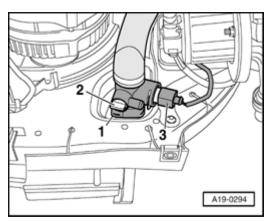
Identifying Drain Plug Courtesy of VOLKSWAGEN UNITED STATES, INC.
